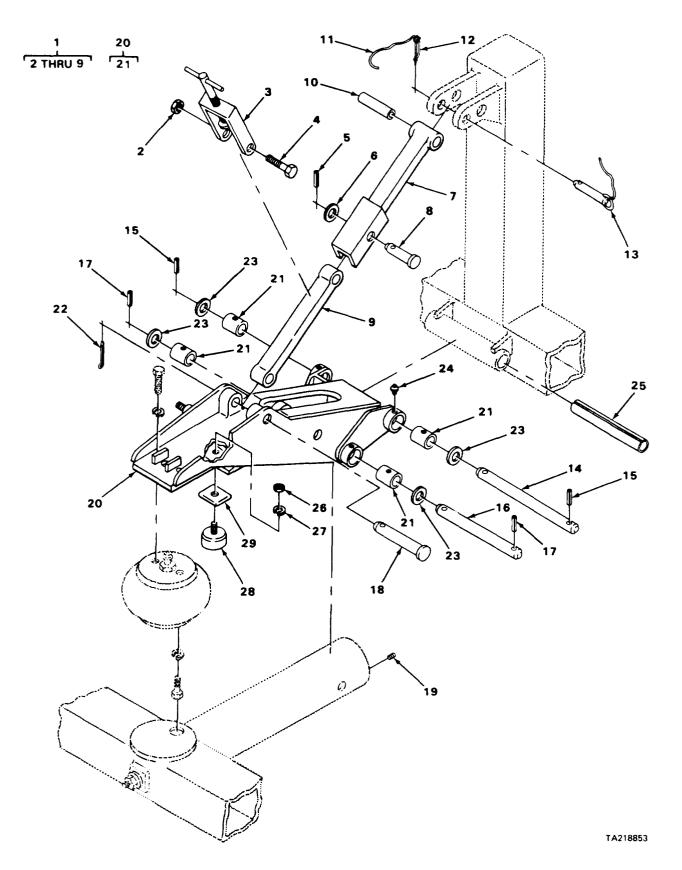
STRUT AND ROCKER ARM ASSEMBLY.
